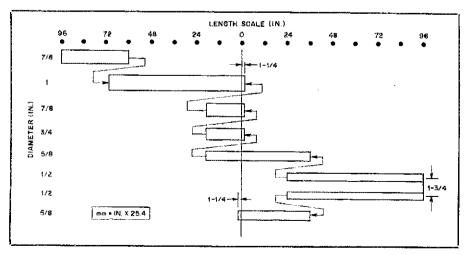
Exploded view of the driven-element tubing, showing diameters and lengths for the various tubing sections.
